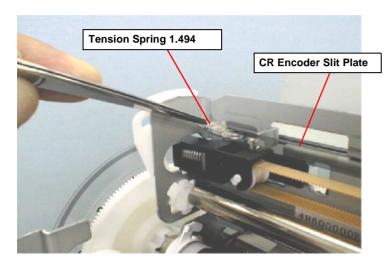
Remove the Tension Spring 1.491& CR Encoder Slit
